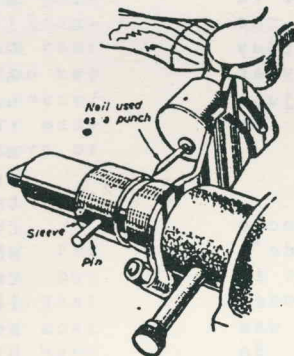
Driving out pin which secures driving sleeve on distributor spindle.
